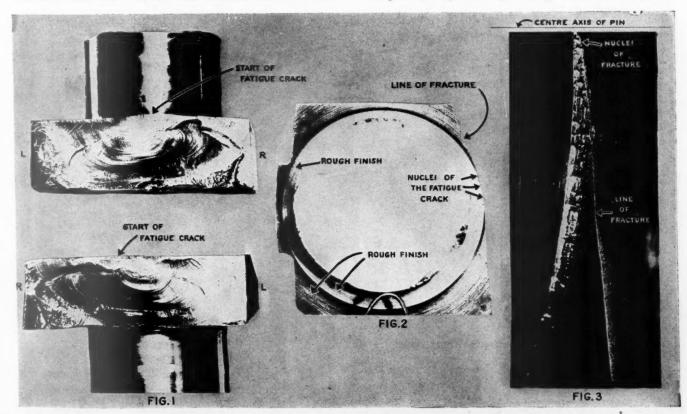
Fractured faces of broken Diesel engine crank shaft.—Fig. 2: Section through crank pin of large crank shaft.—The fillets at the juncture of the crank pin and crank arm and a short distance away on the crank arm are both rough finished.—Fig. 3: Enlarged view of fillet in which fatigue crack started—designated as "ff" finish by manufacturer of crank shaft
